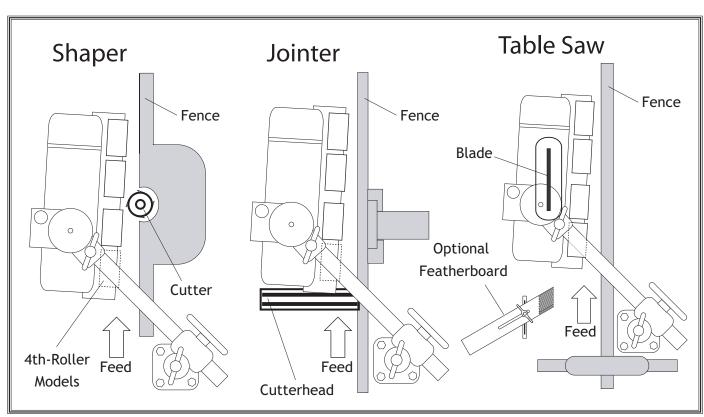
Typical power feed mounting on a shaper, jointer, and tablesaw.
